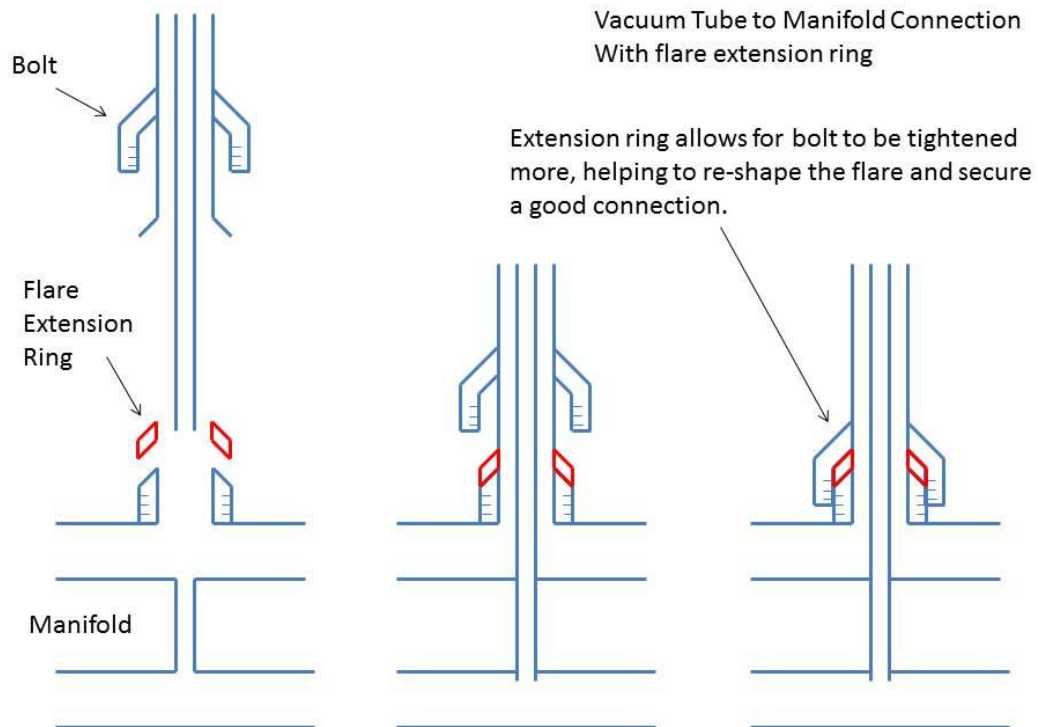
Vacuum Tube to Manifold Connection (Flare Extension Ring)
